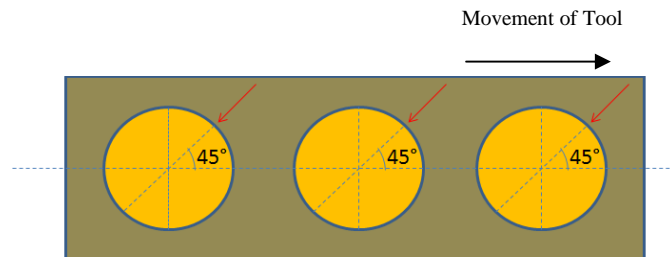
Schematic of a wafer with solder joints. Red Arrow shows motion of ball shear tool
